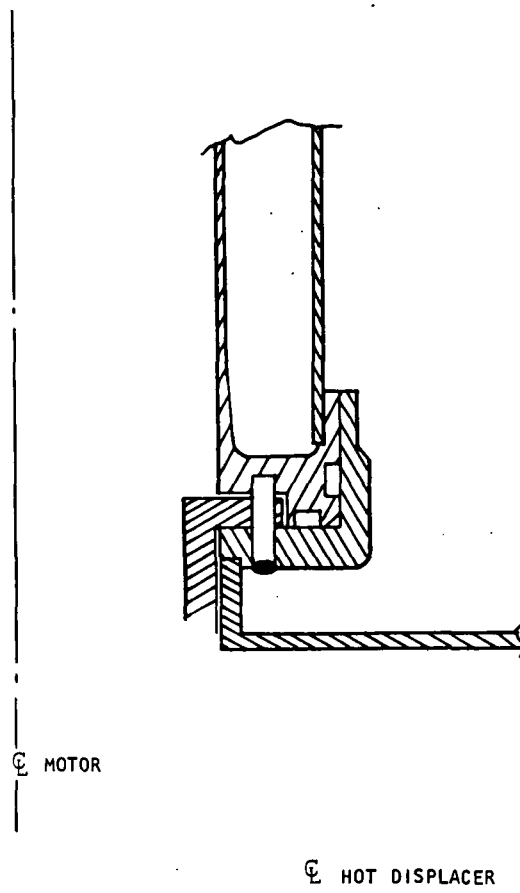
Bayonet Type Lock--Motor Housing Connection to Hot Displacer Housing
